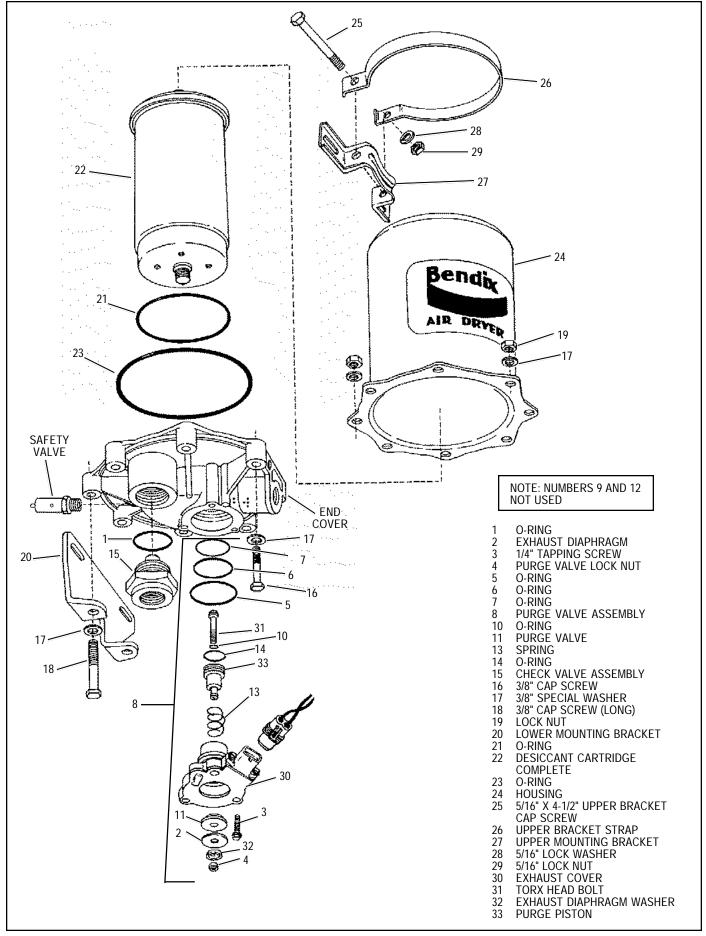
AD-9[™] AIR DRYER ASSEMBLY
